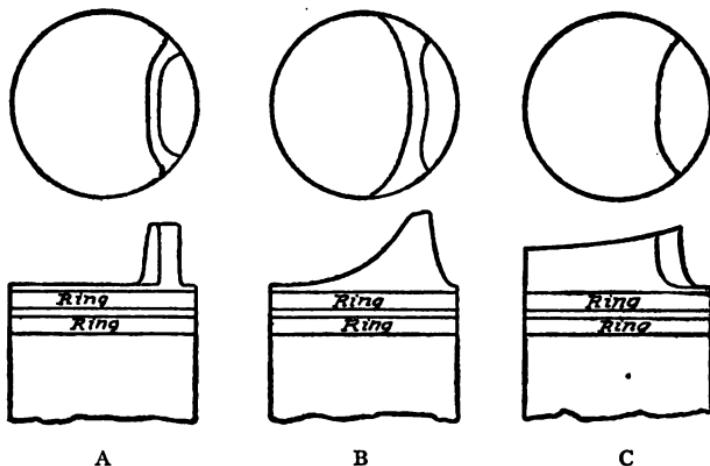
Several piston head shapes used in 2-cycle engines: A, flat head with narrow deflector suitable for slow speed work; B, sloping head with wide deflector ends to prevent gas passing by them; C, built-in deflector.
